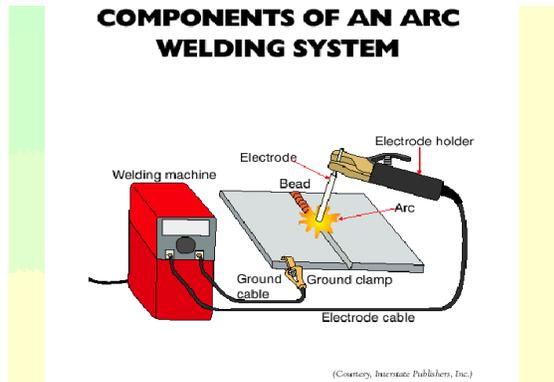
Set up Shielded Metal Arc Welding process
